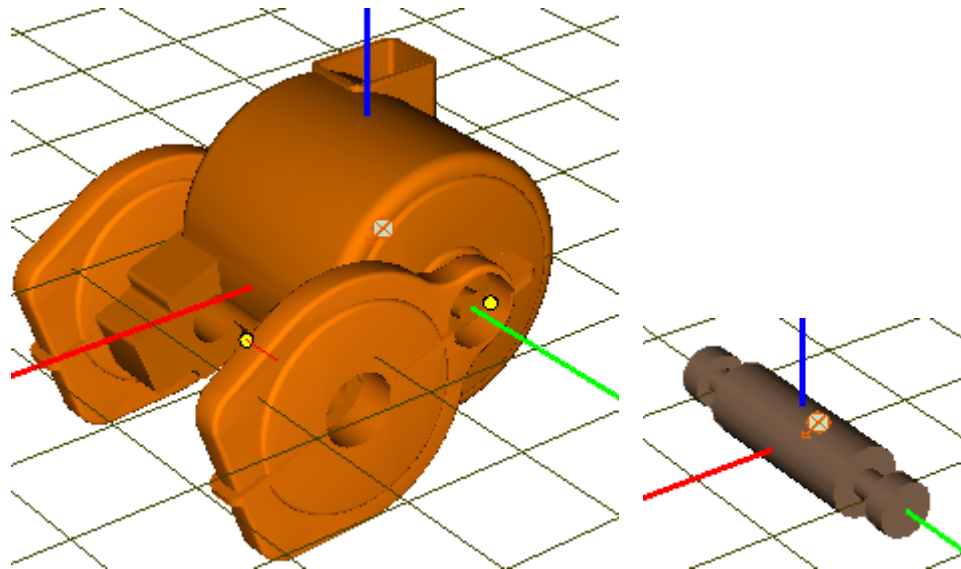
Bodies: motor and reducer casings; drive shaft
